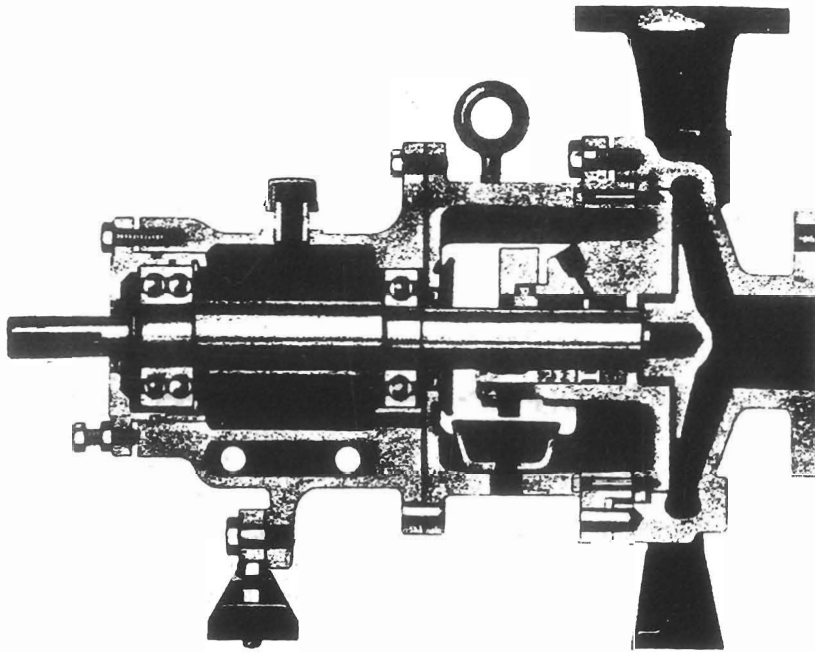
Acid and slurry pump with two possible stuffing-box constructions shown (Goulds Pumps Inc.)
